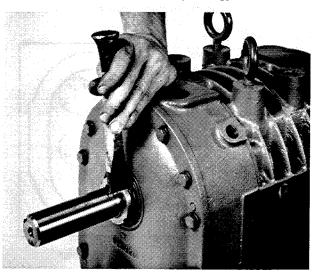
TIGHTENING DRIVE SHAFT LOCK NUT SECURELY WITH BLUNTED CHISEL AND BALL PEEN HAMMER
